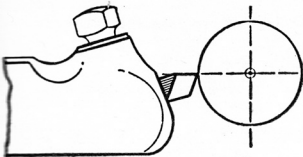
Top of cutter bit set on center for cutting screw threads.
